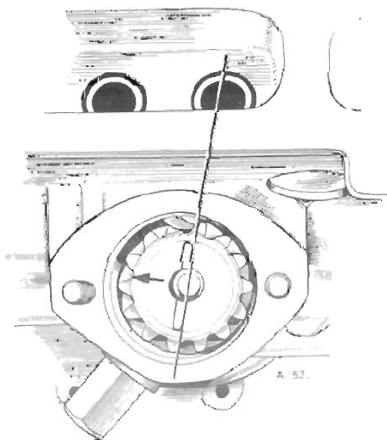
Position of slot in distributor drive gear with No. 1 piston at T.D.C. on the compression stroke (Vitesse)
